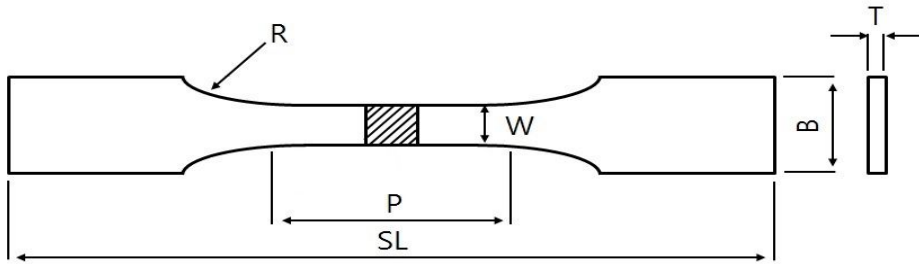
Dimension of fatigue test specimen (3mm)
